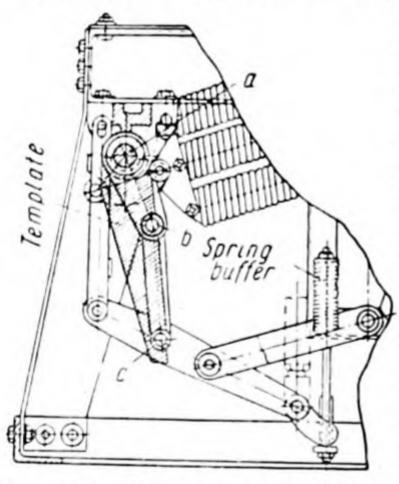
Checking of MΓΓ-299 circuit breaker mechanism
